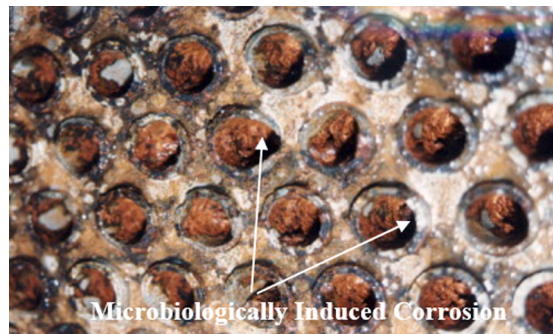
Microbiologically Induced Corrosion at tube-to-tubesheet joints [246].
